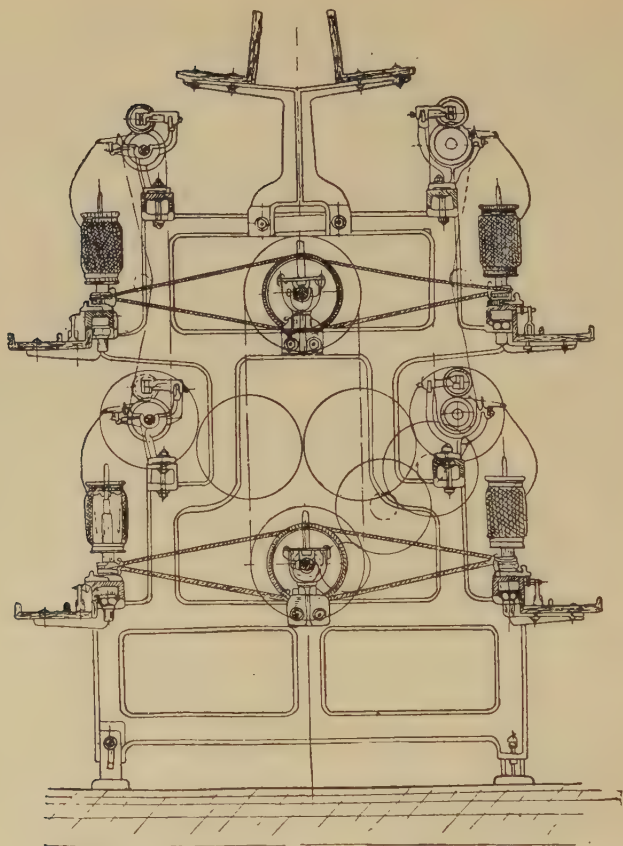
Two-decker Twisting Machine. (Courtesy Wheeler.)
